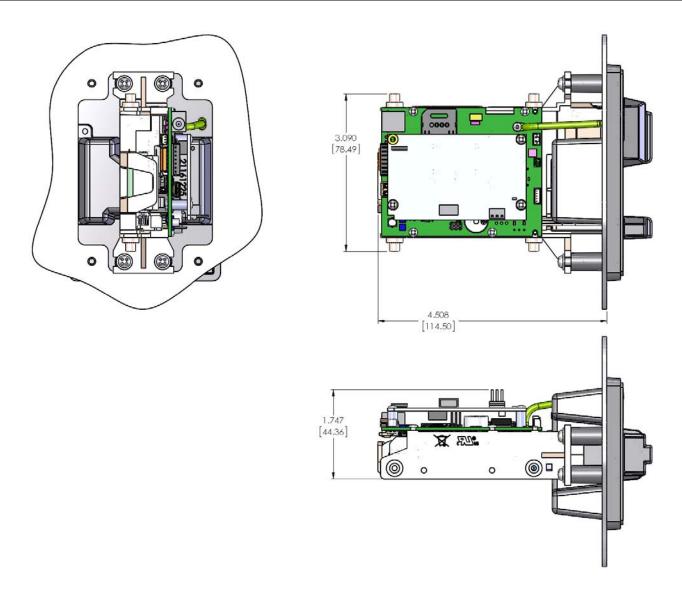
Panel Cutout Dimensions For International Bezel Mounting
